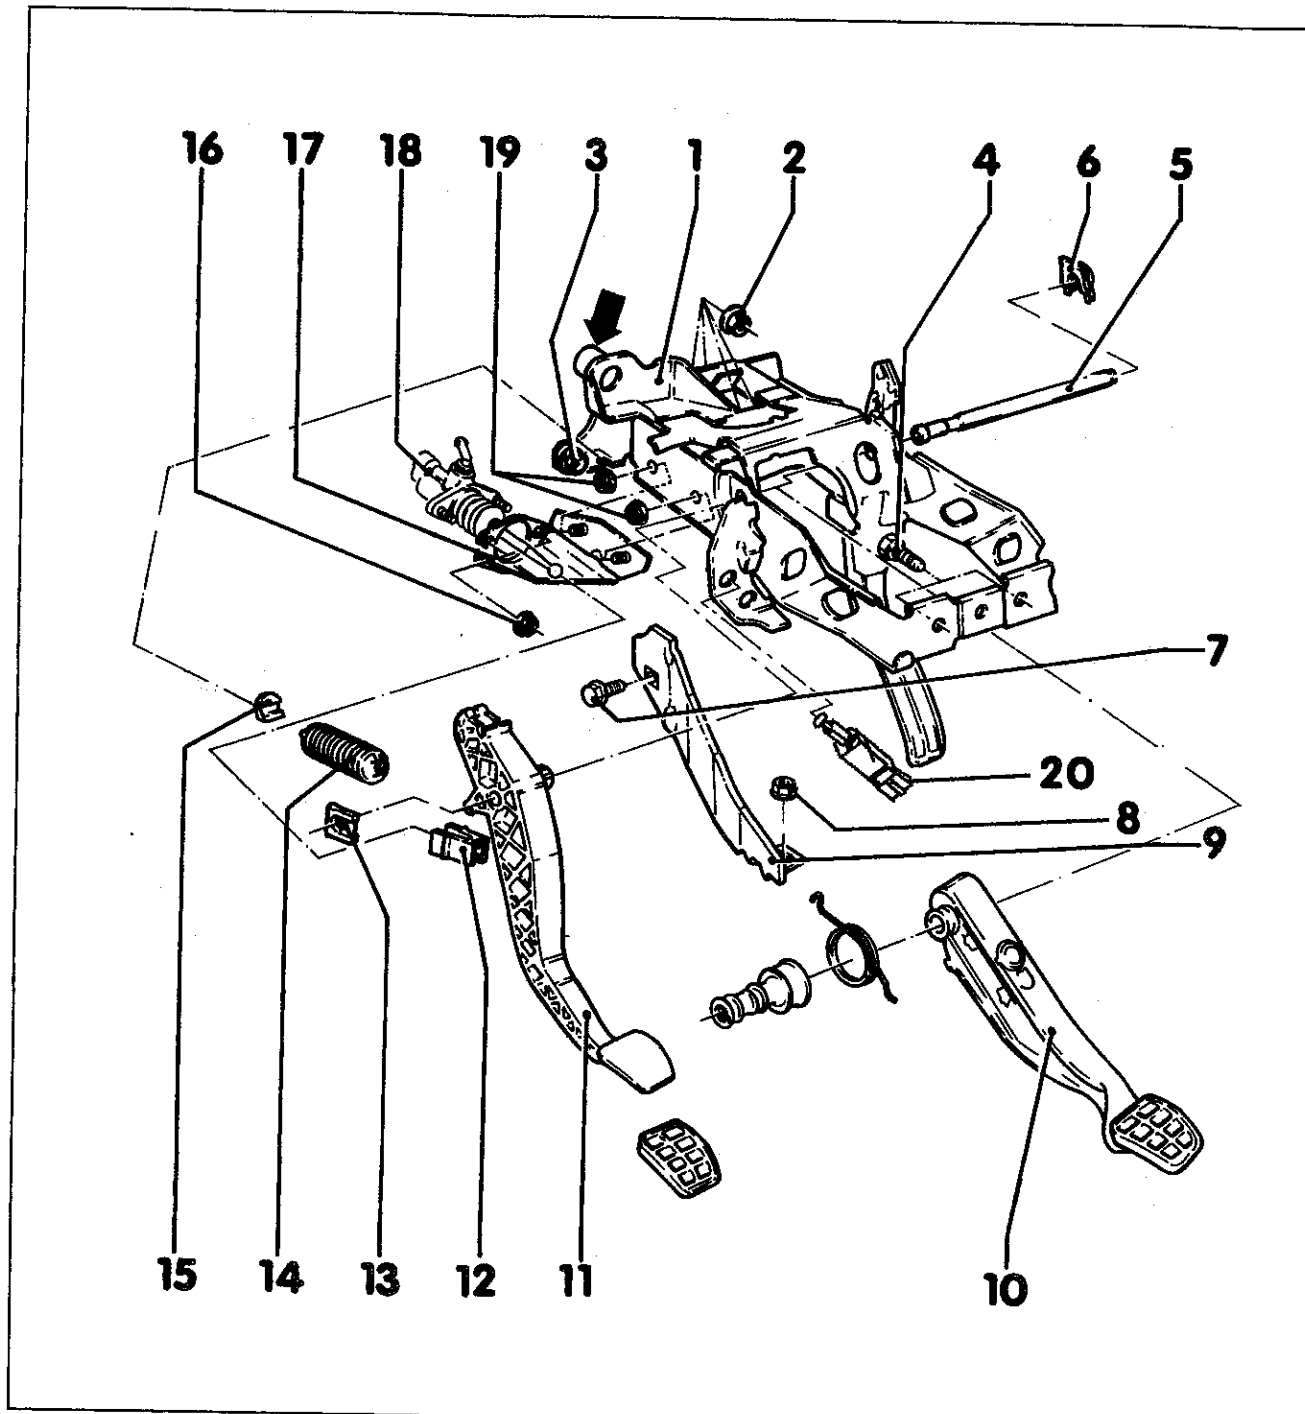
Exploded view of clutch actuating mechanism and related parts.
